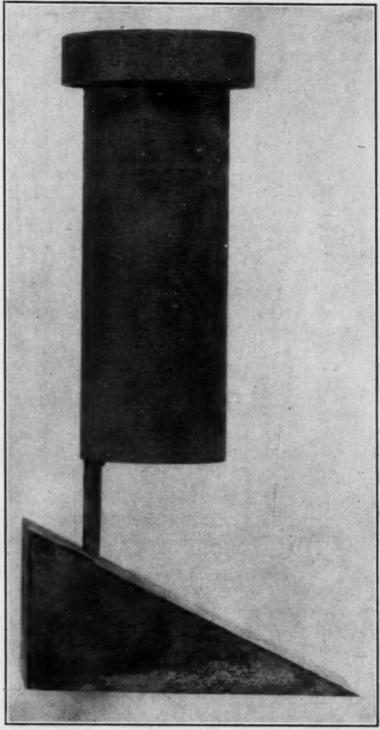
Rectangular Wedge Specimen, Angle 26.5 Degrees, with Assembly for Quenching.
